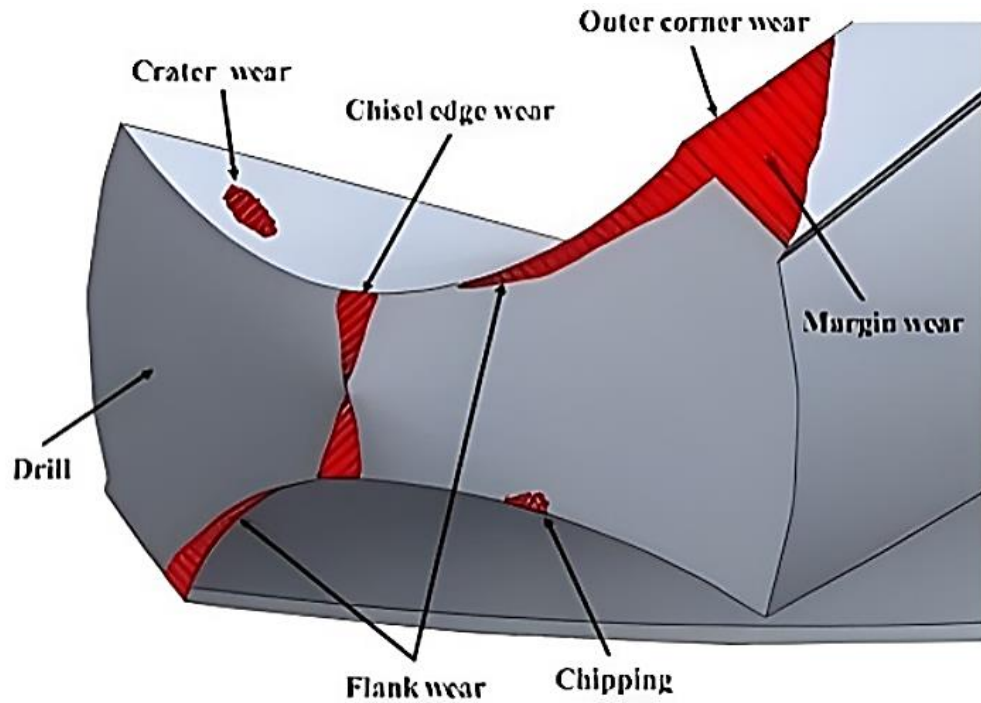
Different types of tool wear illustrated in a drill tool [1].
